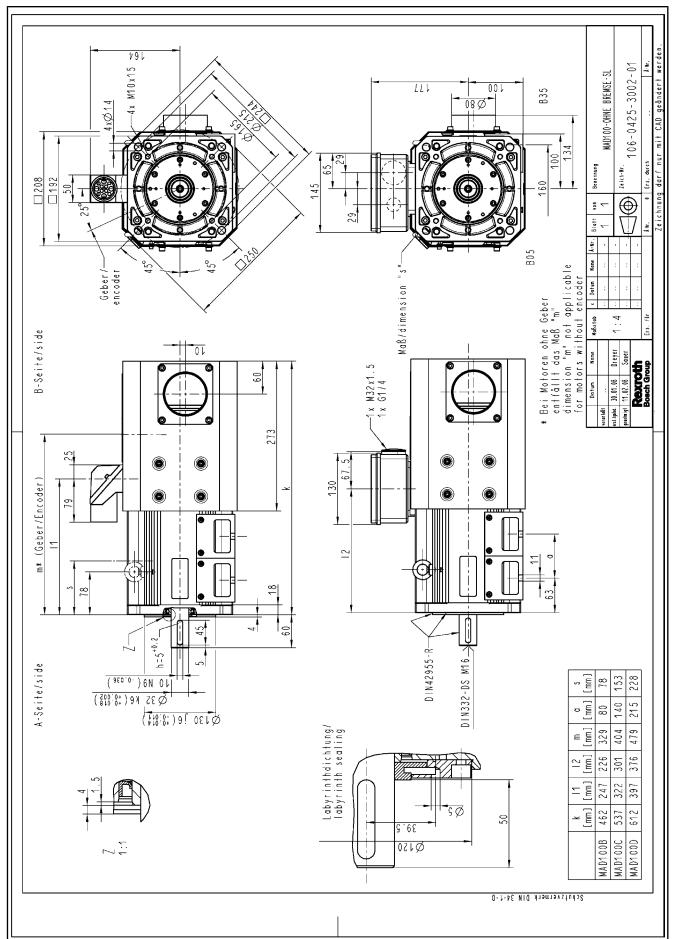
Dimension sheet MAD100 with brake 1/5
